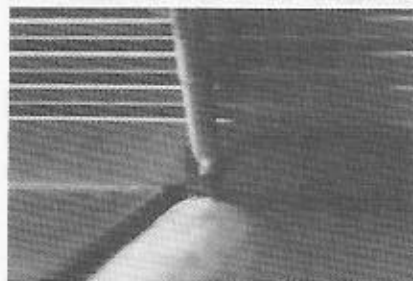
Lower the infeed table until your straightedge just contacts the cutterhead, and carefully mark the point of contact.
